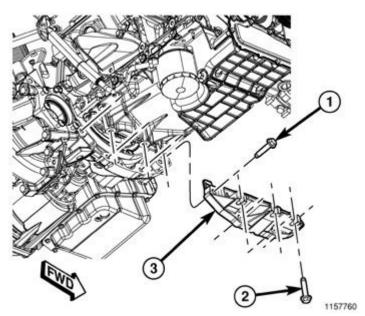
Structural Collar Courtesy of CHRYSLER LLC
